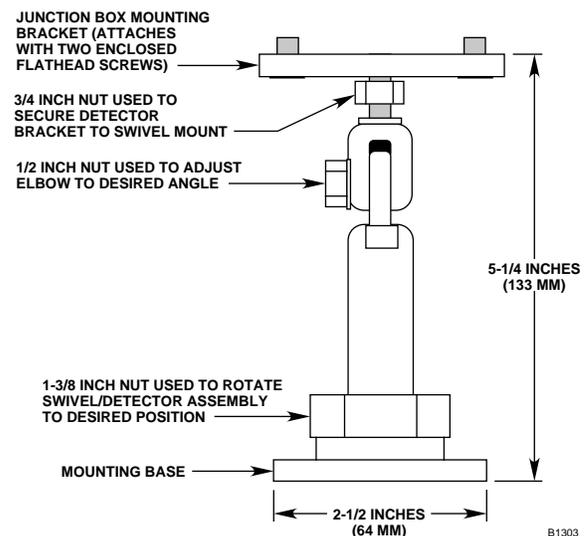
Q9001G Swivel Mounting Bracket Dimensions
